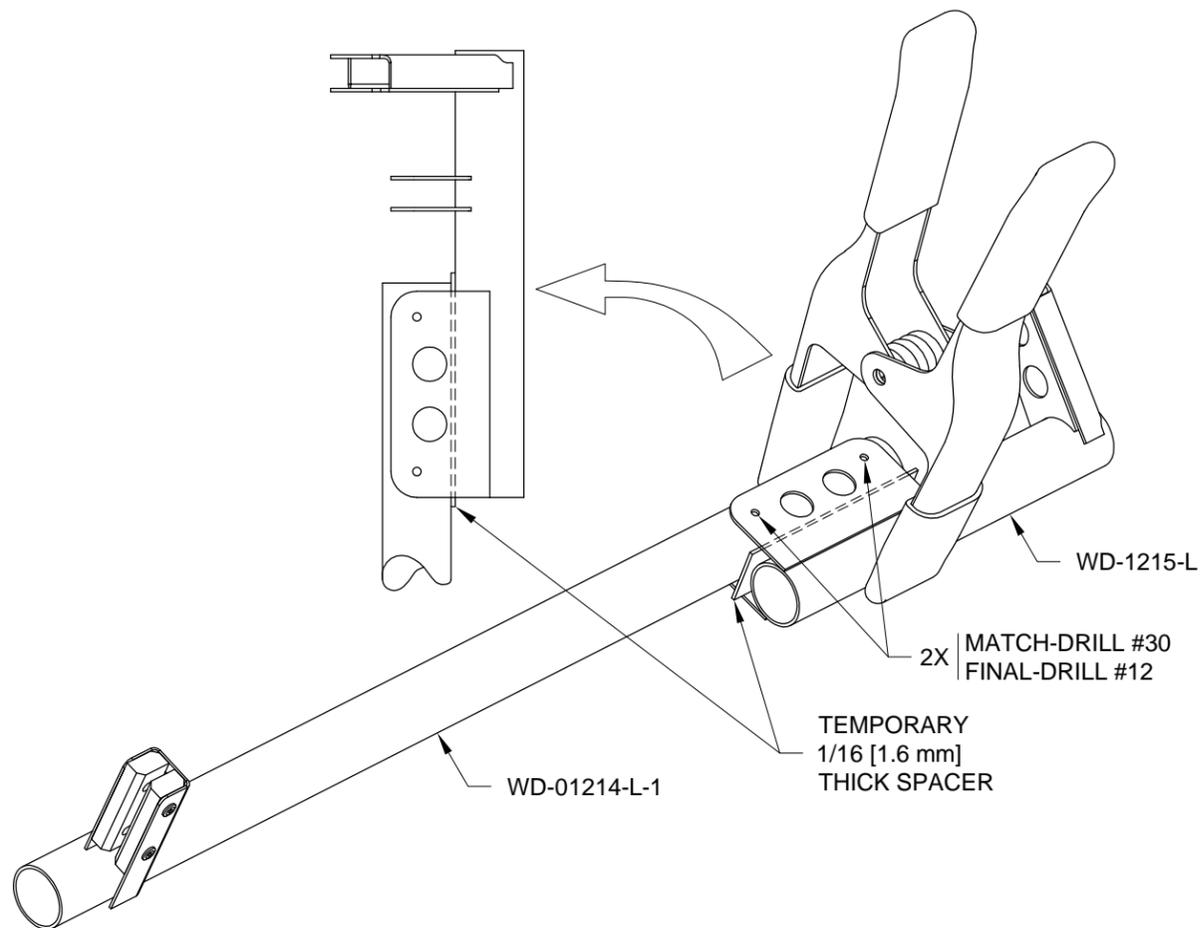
DRILLING THE FLAPERON TORQUE TUBES
